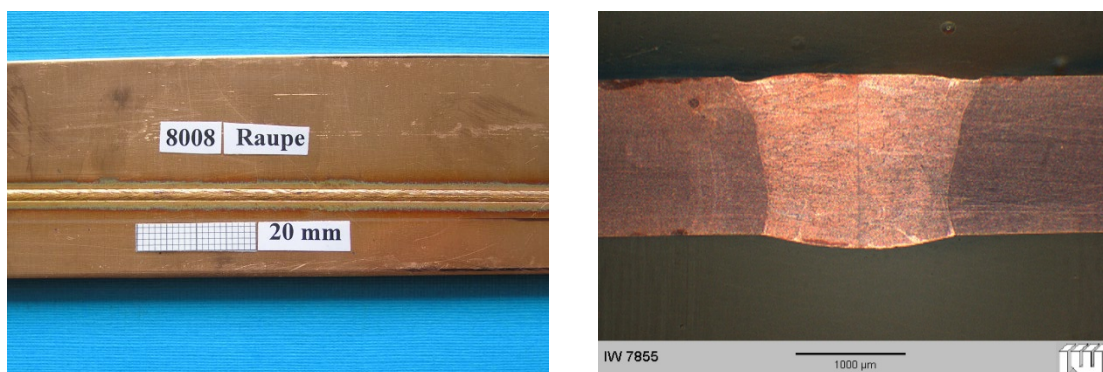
Weld seam and cross-section of 1.5 mm DHP-copper (beam current 45 mA, work distance 15 mm, welding speed 10 m/min)
